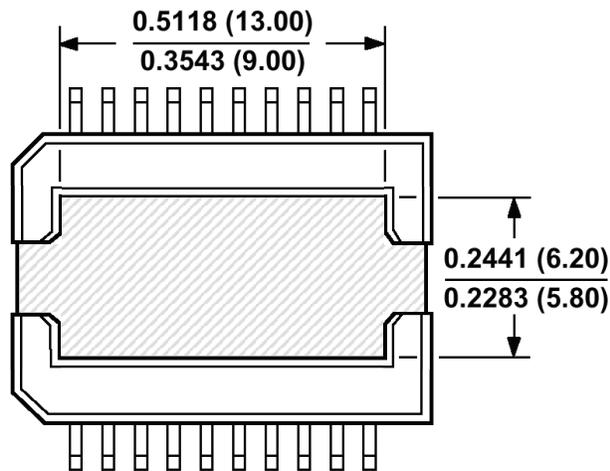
Bottom View of AD8016 20-Lead PSOP3 Package Showing Copper Slug for Aid in Heat Transfer (Central Grayed Area)
